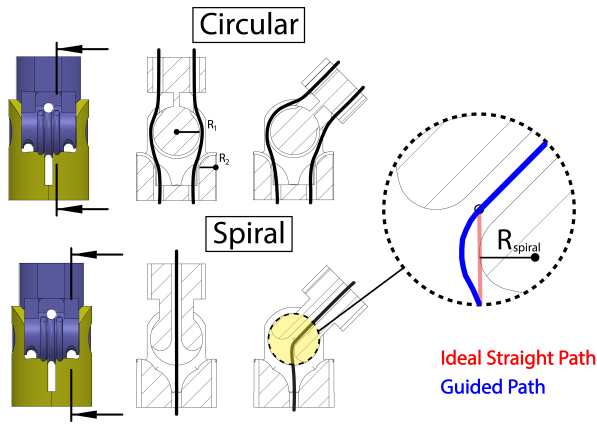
Elbow joint cable routing illustrating its circular and spiral grooves. The cable routing (black lines) are illustrated for each groove type. The ideal versus guided path of the cable is illustrated for the spiral groove.
